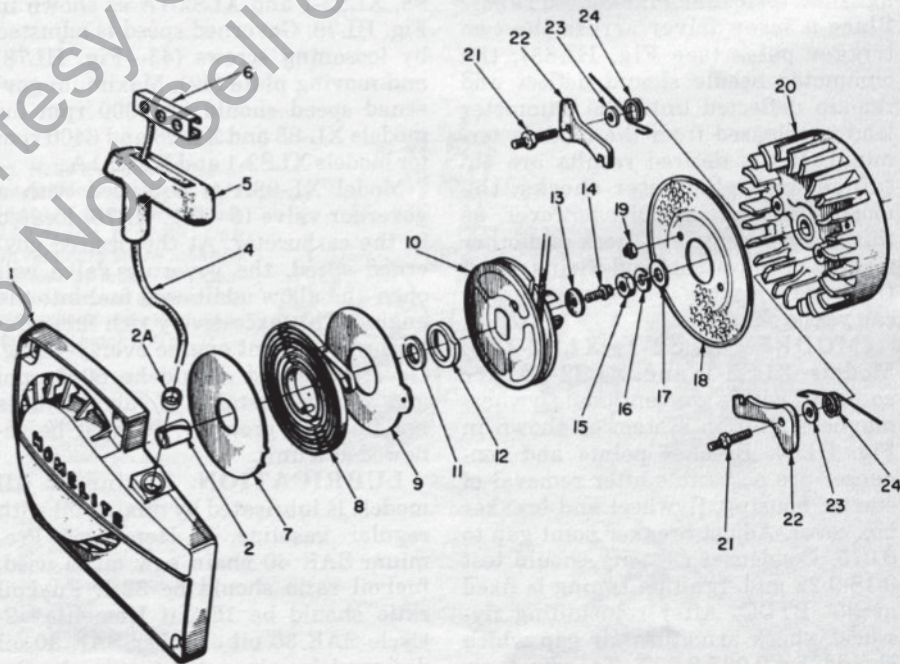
Exploded view of typical rewind starter assembly and engine flywheel.
